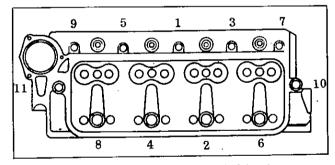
The Order of Tightening the Cylinder Head Nuts
